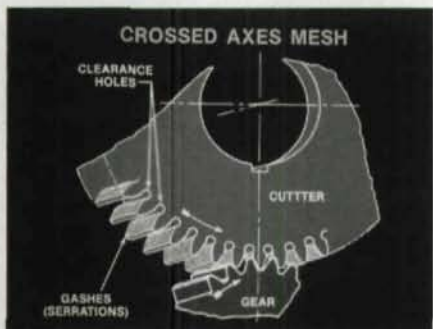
Work gear in crossed-axes mesh with rotary shaving cutter mounted above.
